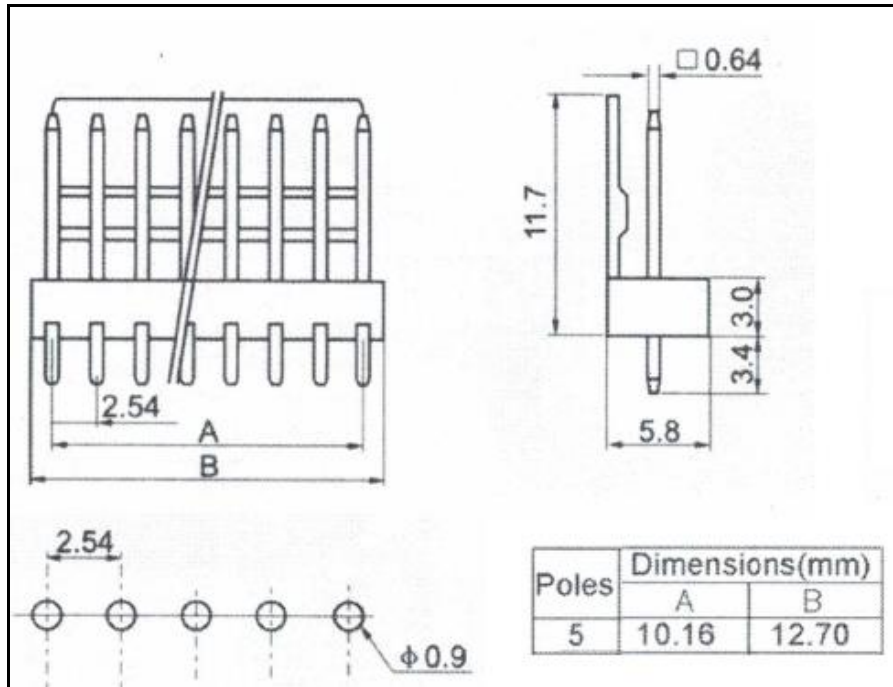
Dimension of connector socket J2 soldered onto PCB
